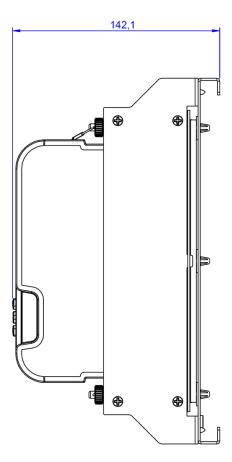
Flow-X/S Din rail mounted side view dimensions
